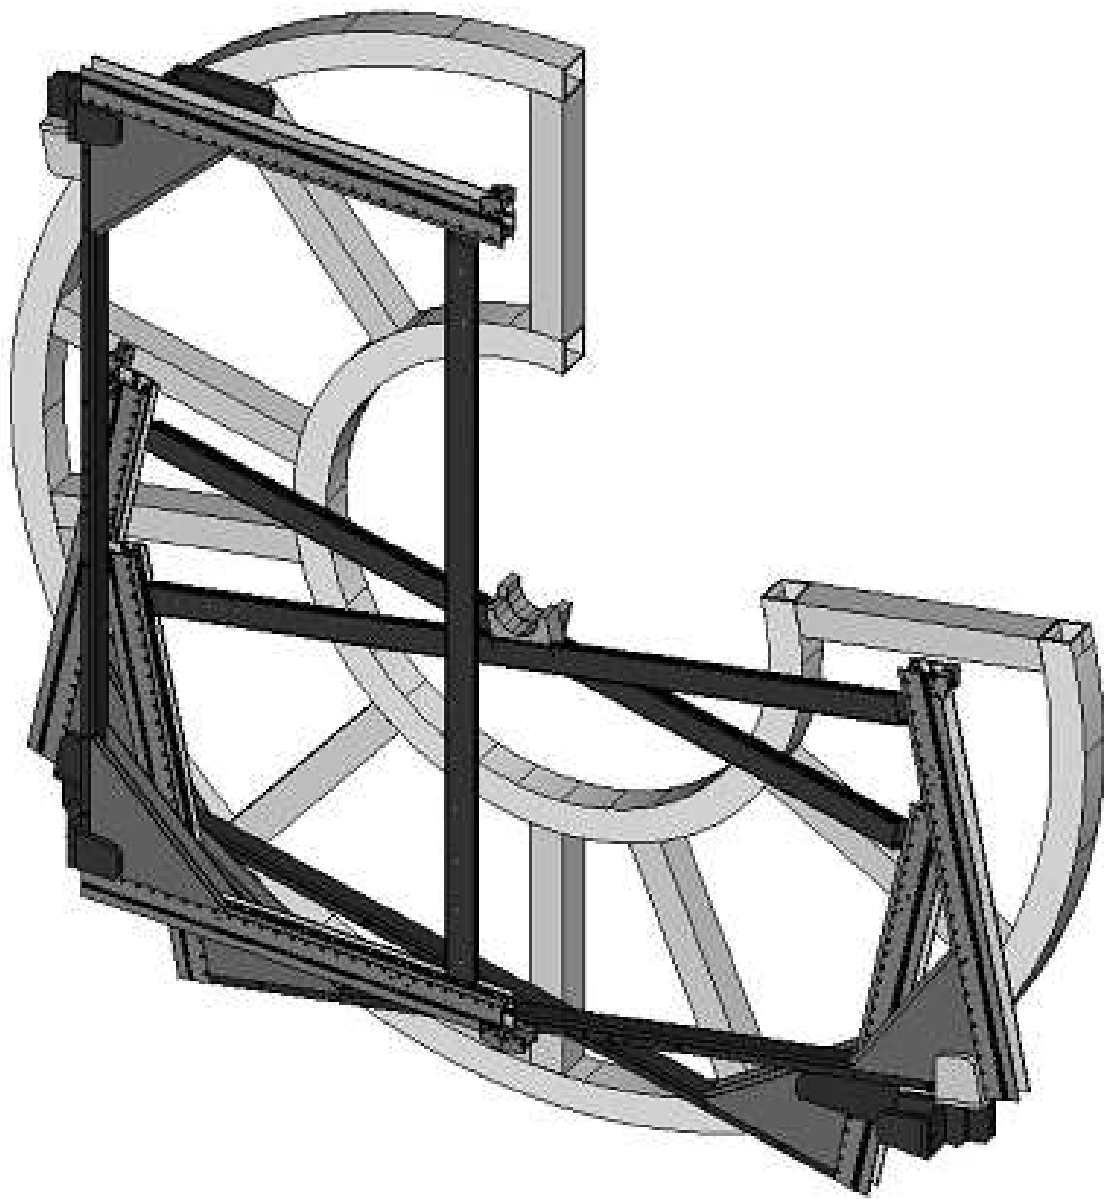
The straws are suppressed in this drawing for clarity. The three frames for the X, U and V views are assembled and mounted to the installation wheel. The wheel allows the half-station to be brought in to the beam pipe and then rotated around the beam pipe into position. The second half station is similarly brought into place and then the two halves are mated and hung from their overhead supports.
